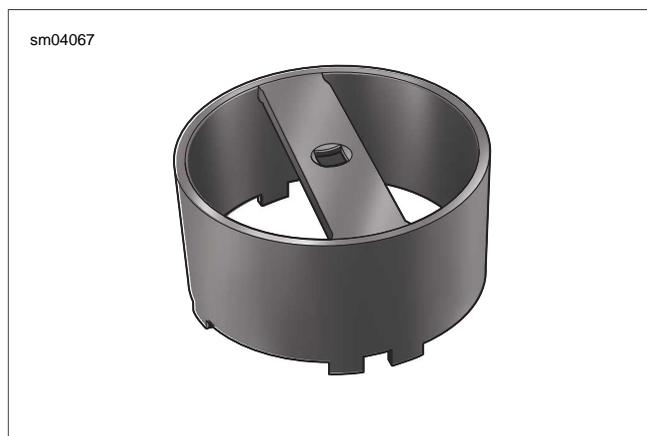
Cam Ring Remover/Installer (HD-48646)
